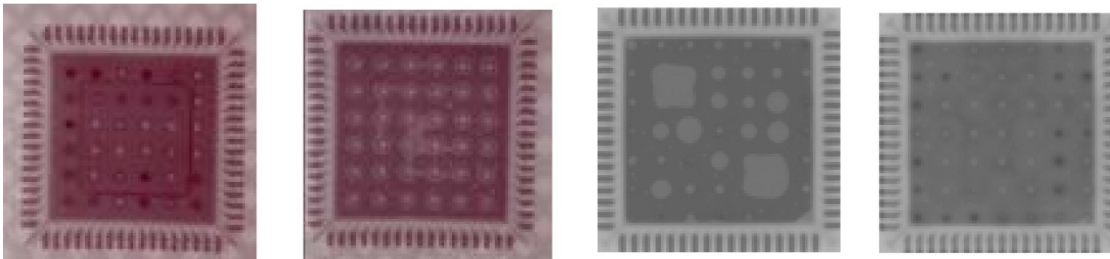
X-ray pictures of MLF packages mounted on boards with different via treatments
